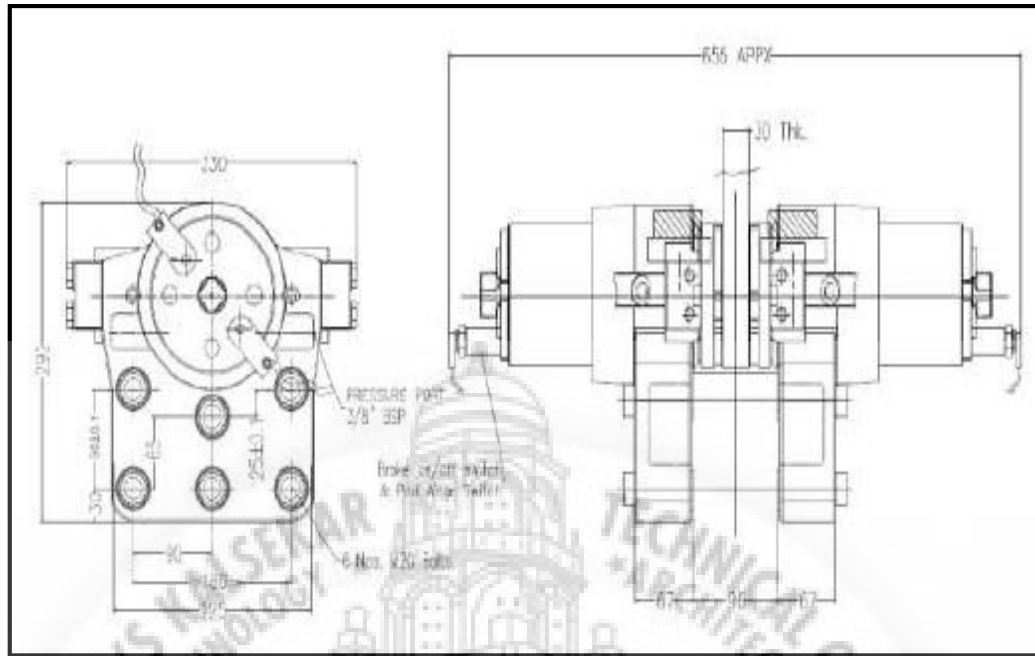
Hydraulic Fail-Safe Disc Brake
